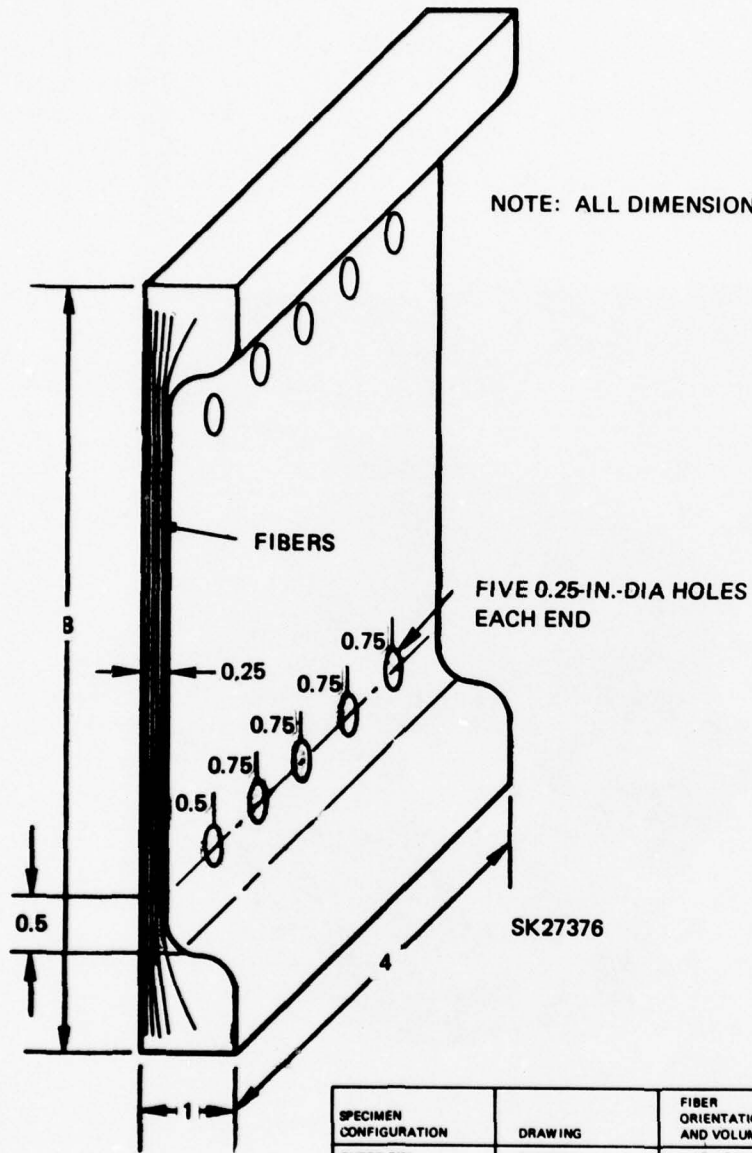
Simulated Bevel Gear Support Housing Specimen.
